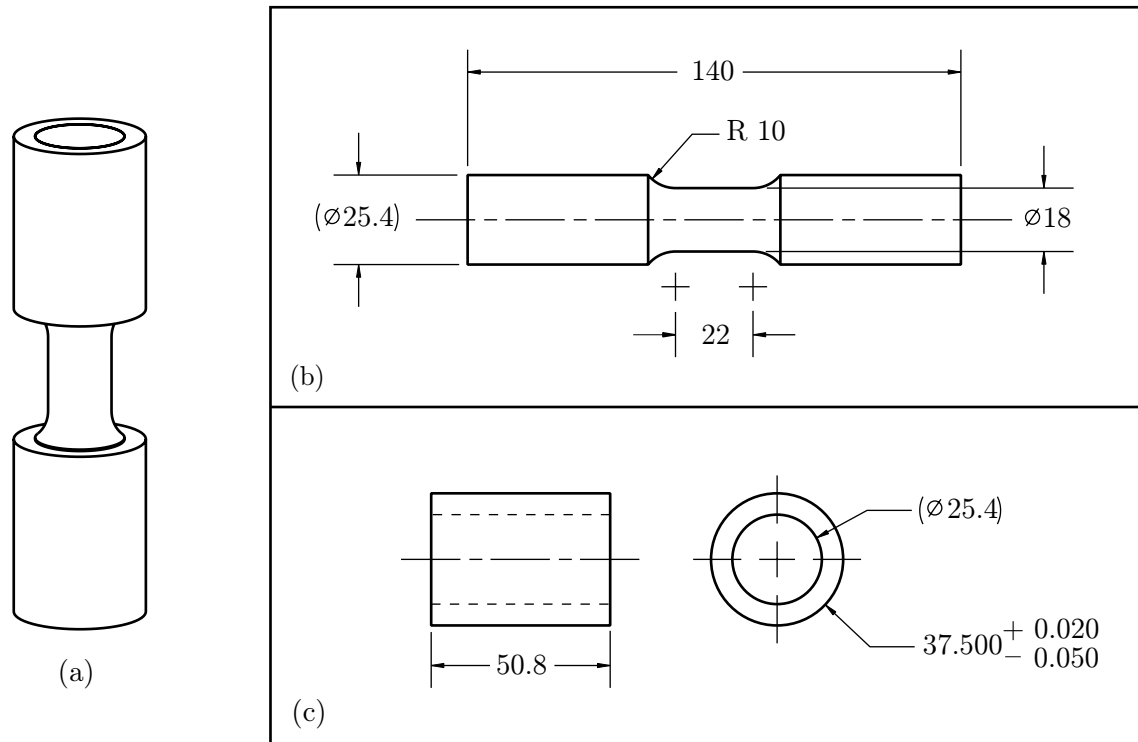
Specimen used for compression-tension experiments. All dimensions are in millimeters. (a) Isometric view of assembled specimen. (b) PMMA specimen engineering drawing. (c) Aluminum sleeve engineering drawing.
